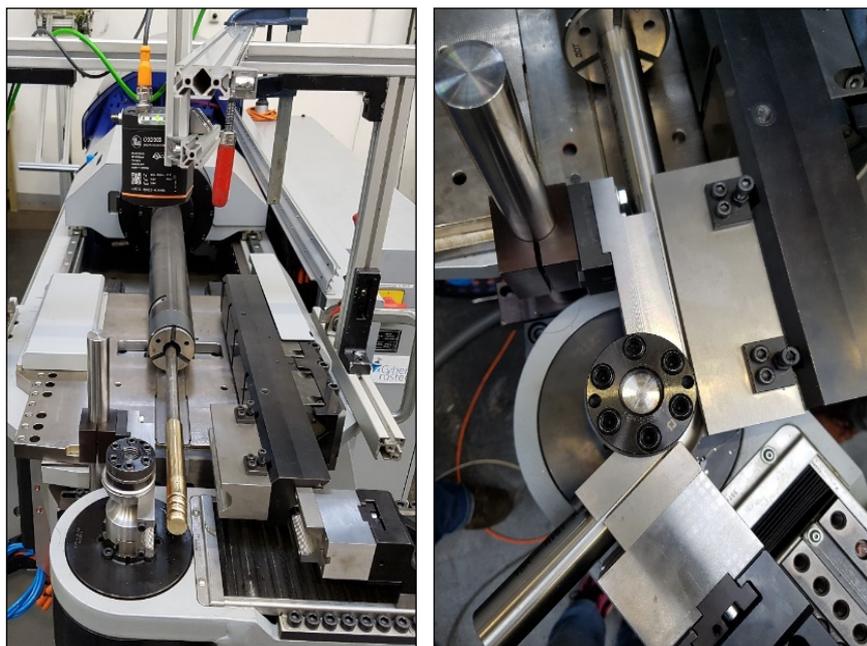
Mounted tools on a bending machine (Credits: UTS_Linda Schulte)
